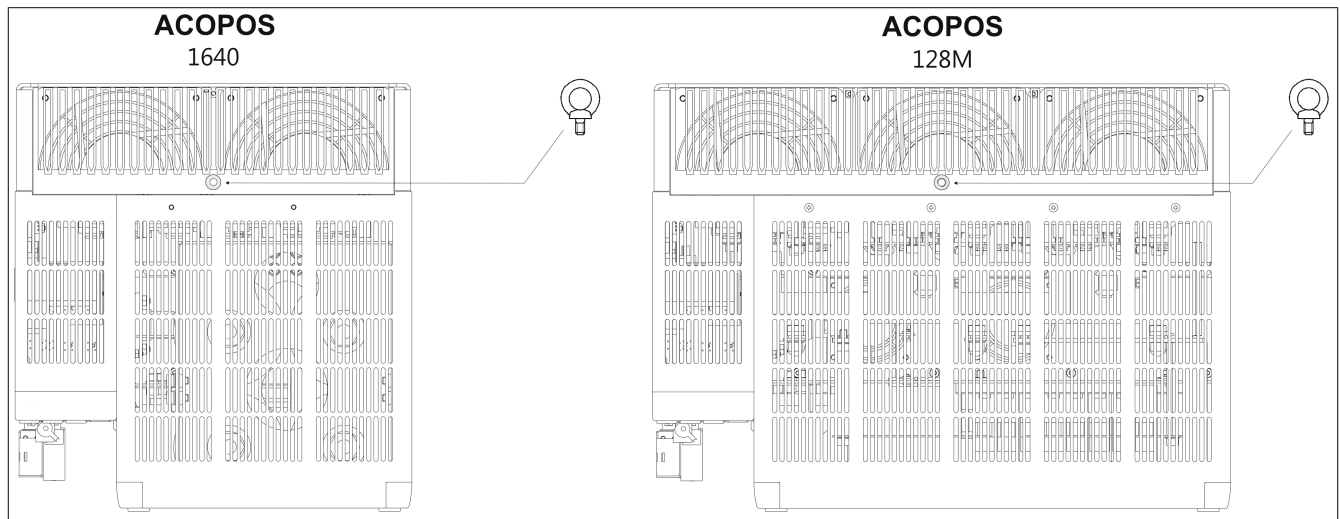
Attaching the eye bolt included in delivery to ACOPOS 1640, 128M drives
